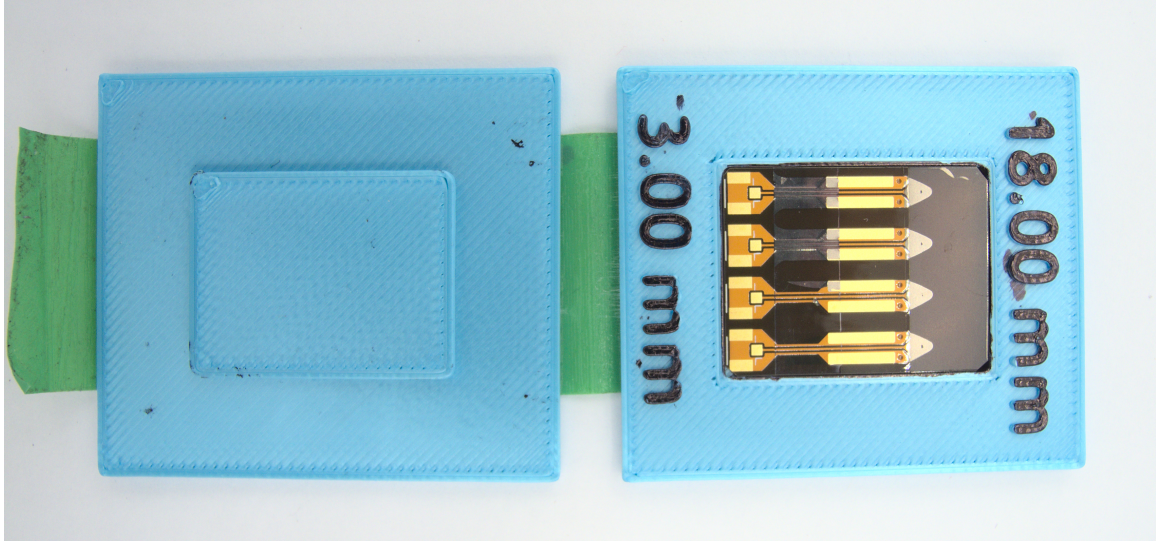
A 3D-printed jig to hold the flex-PCB blanks in place for photolithography flood exposure.
